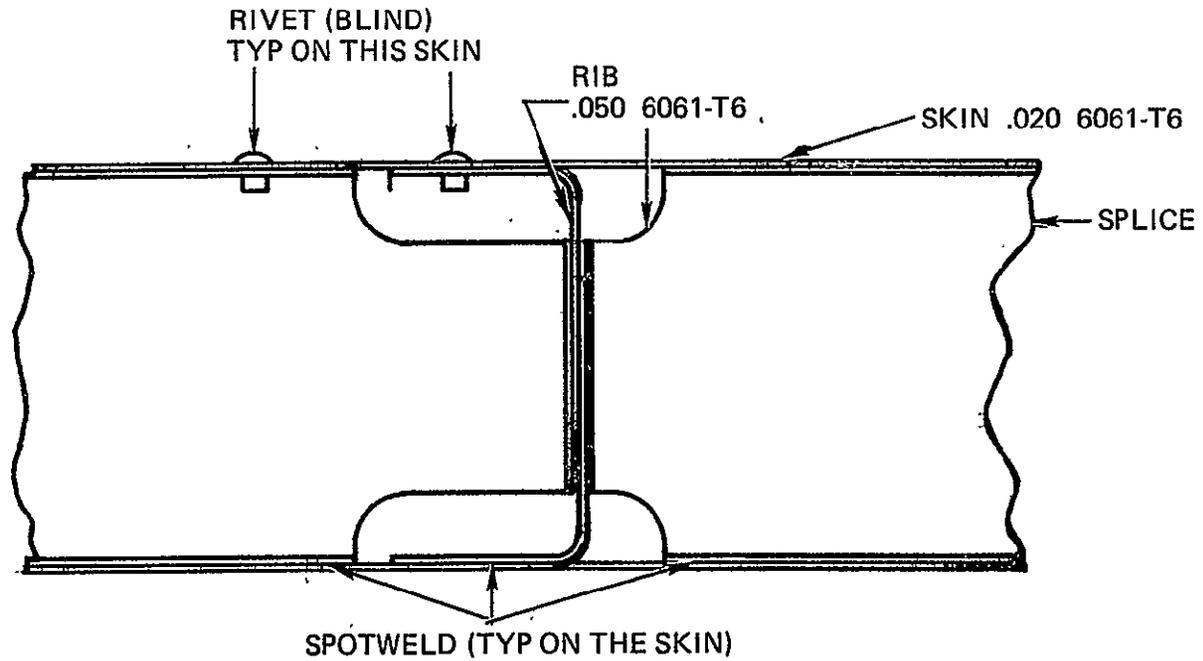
TYPICAL JOINT, ALUMINUM DUAL SIDE RADIATOR
